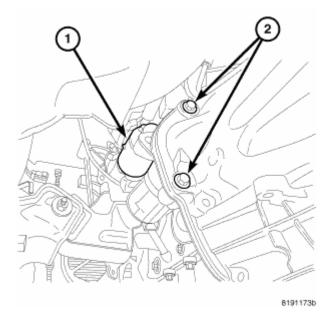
Locating Starter 3.8L Courtesy of CHRYSLER LLC
